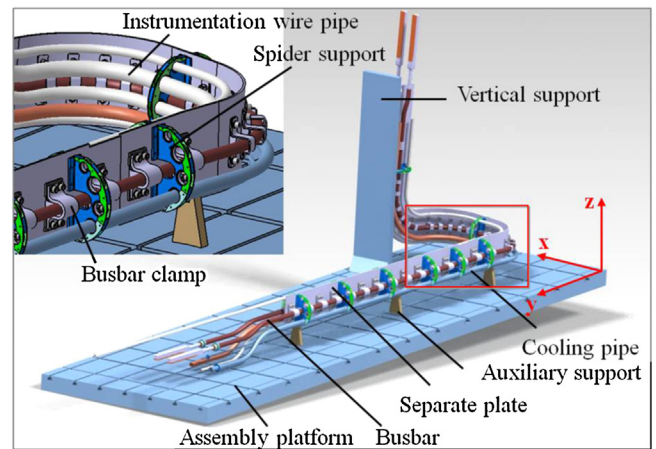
Assembly platform and coordinate system for CFT assembly.
